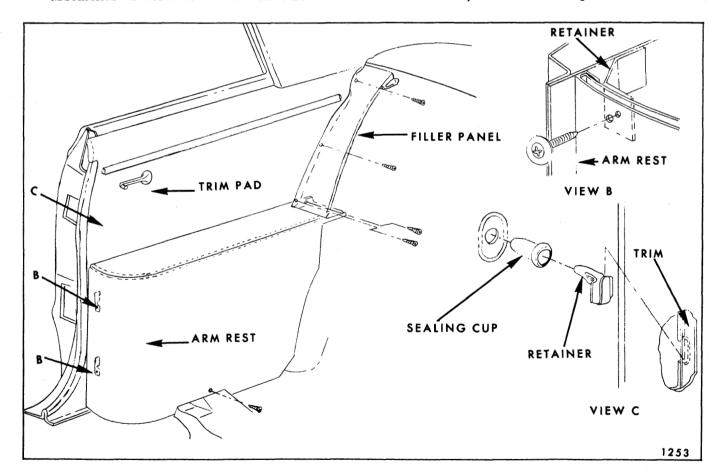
Rear Quarter Trim Assembly (Insert Type)
